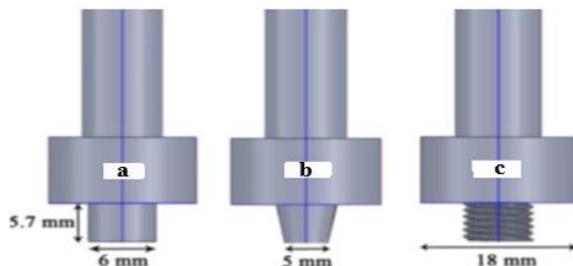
Tool pin shape (a) round pin (R); (b) conical pin (C); and (c) thread pin (T).
